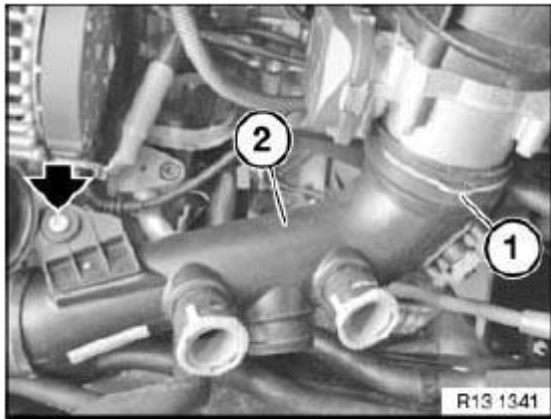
Identifying Quick-Connect Coupling And Charge-Air Duct
